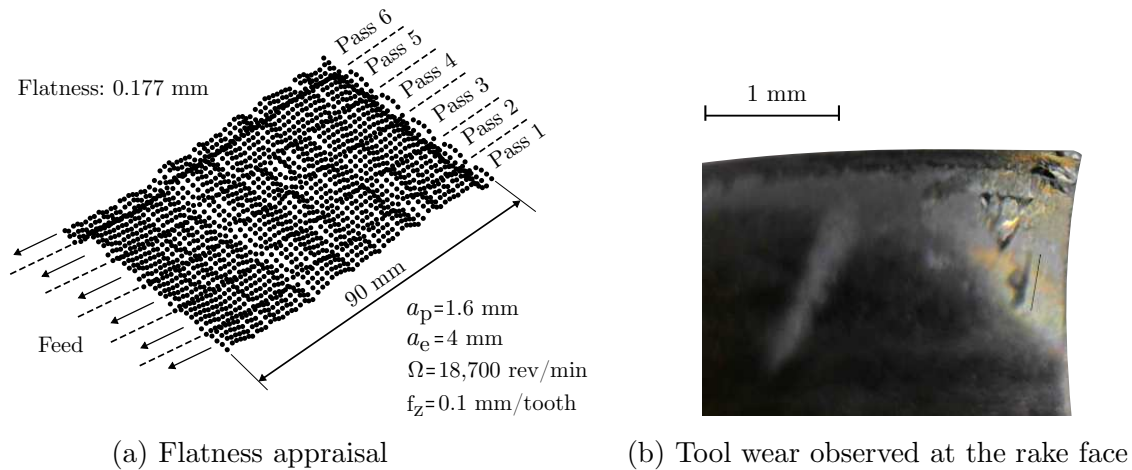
Flatness of a plane machined using longitudinal passes in down milling and illustration of tool wear for the end mill used in aluminium milling
